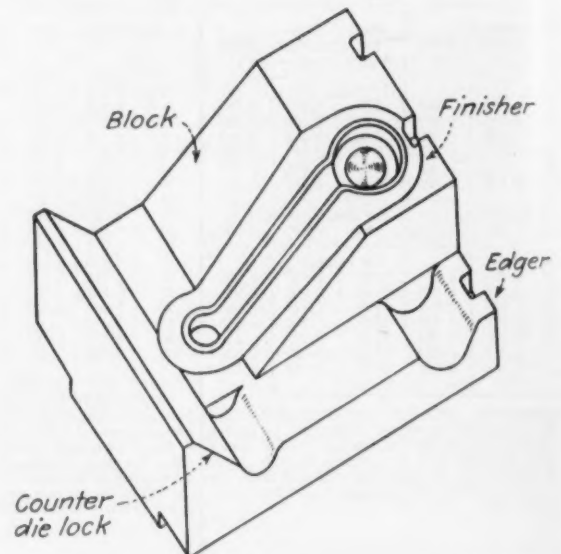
The three basic die components, the blocker, the edger, and the finisher, appear in this one die block. Courtesy, Chambersburg Engineering Co.
